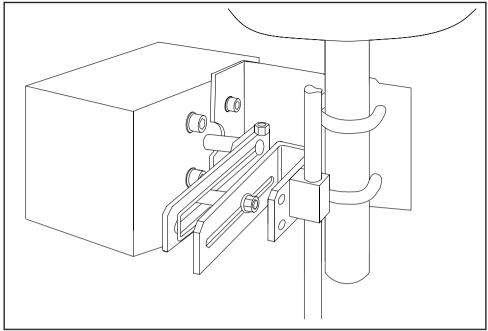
Mounting on a Rod Actuator (IEC 534 part 6)
